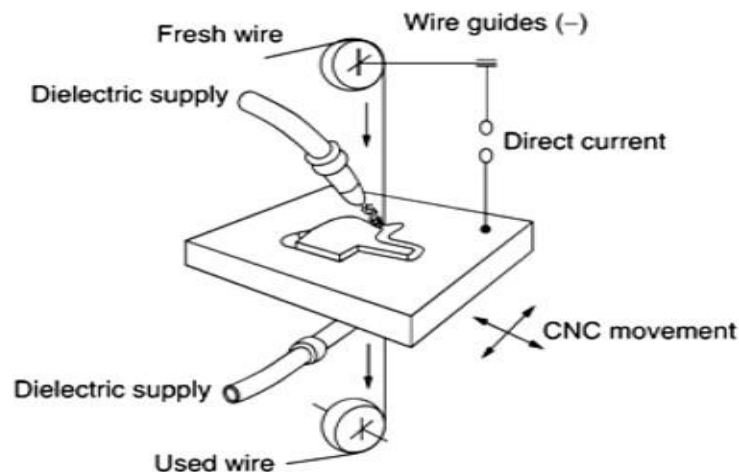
Mechanism of Wire cut EDM<sup>[2]</sup>
